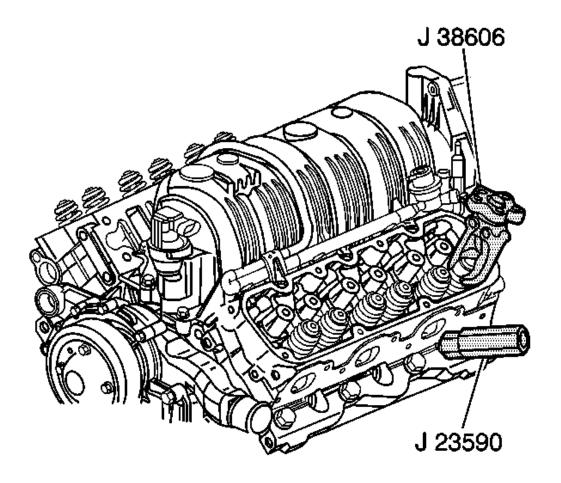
J 38606 Installed On Valve Spring Courtesy of GENERAL MOTORS CORP.
